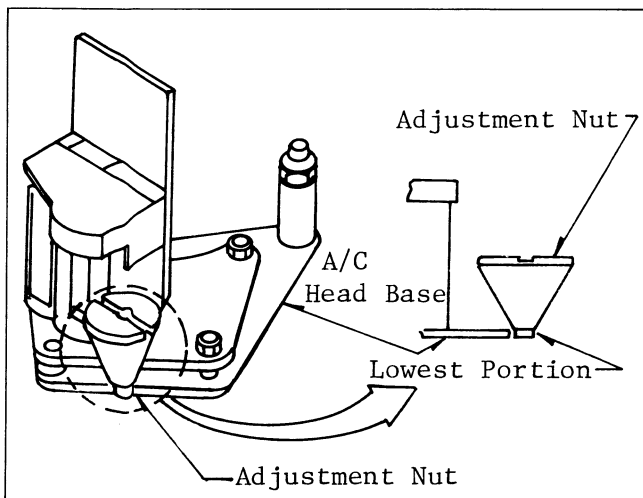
Horizontal Position Adjustment of A/C Head-(1)
